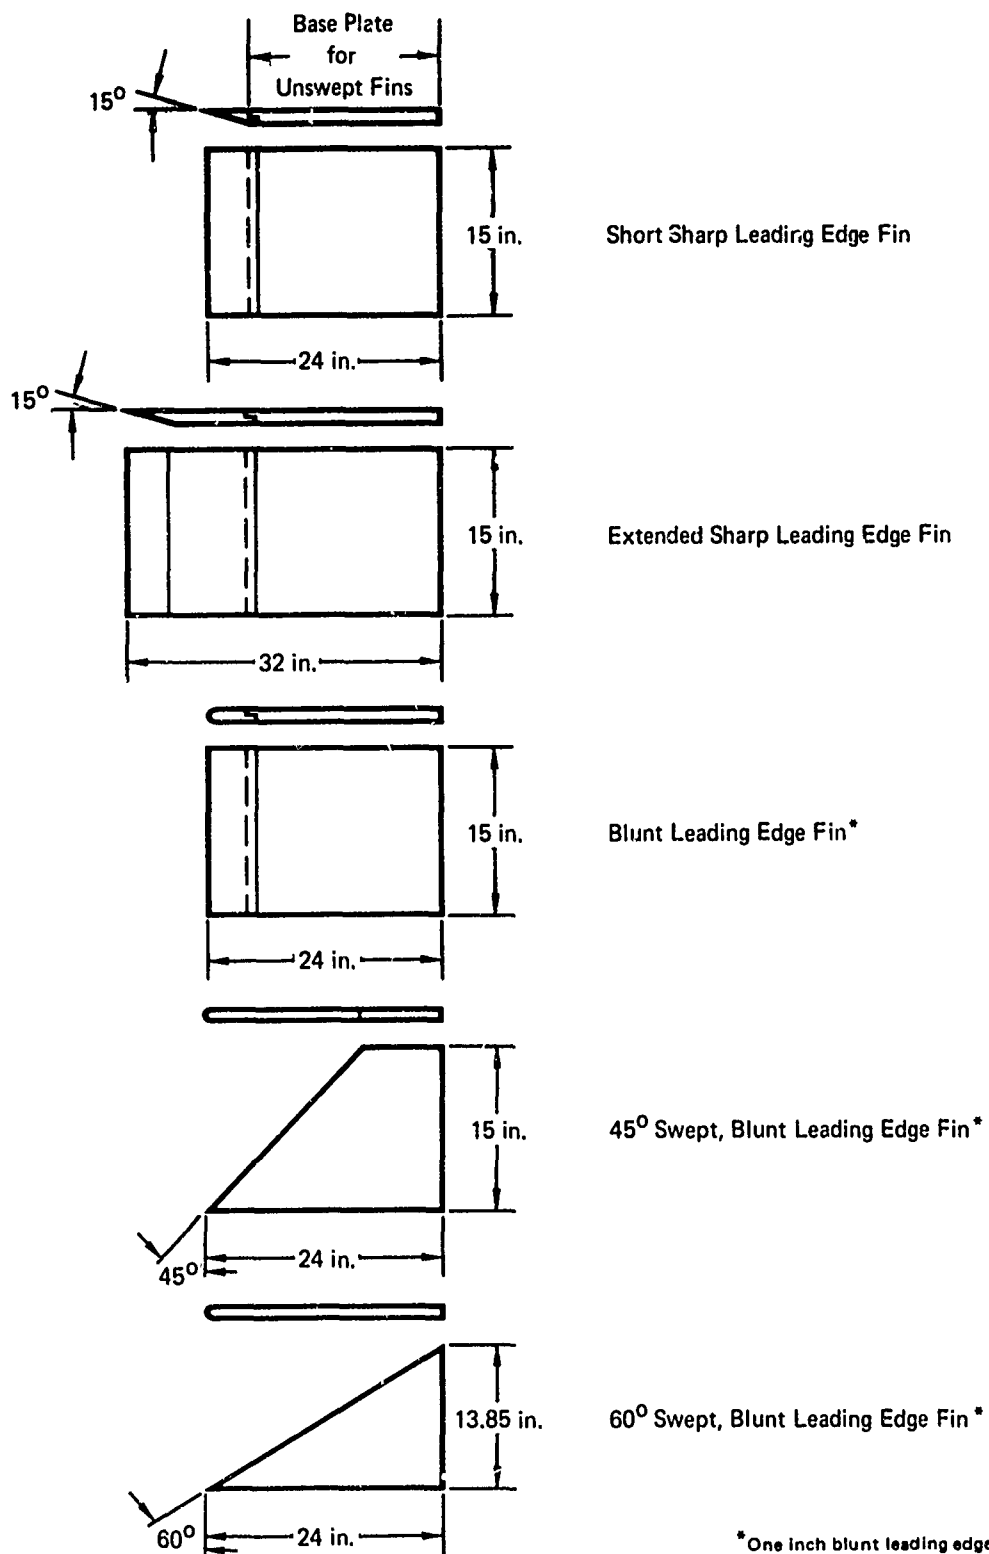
SHOCK GENERATING FIN ASSEMBLIES
